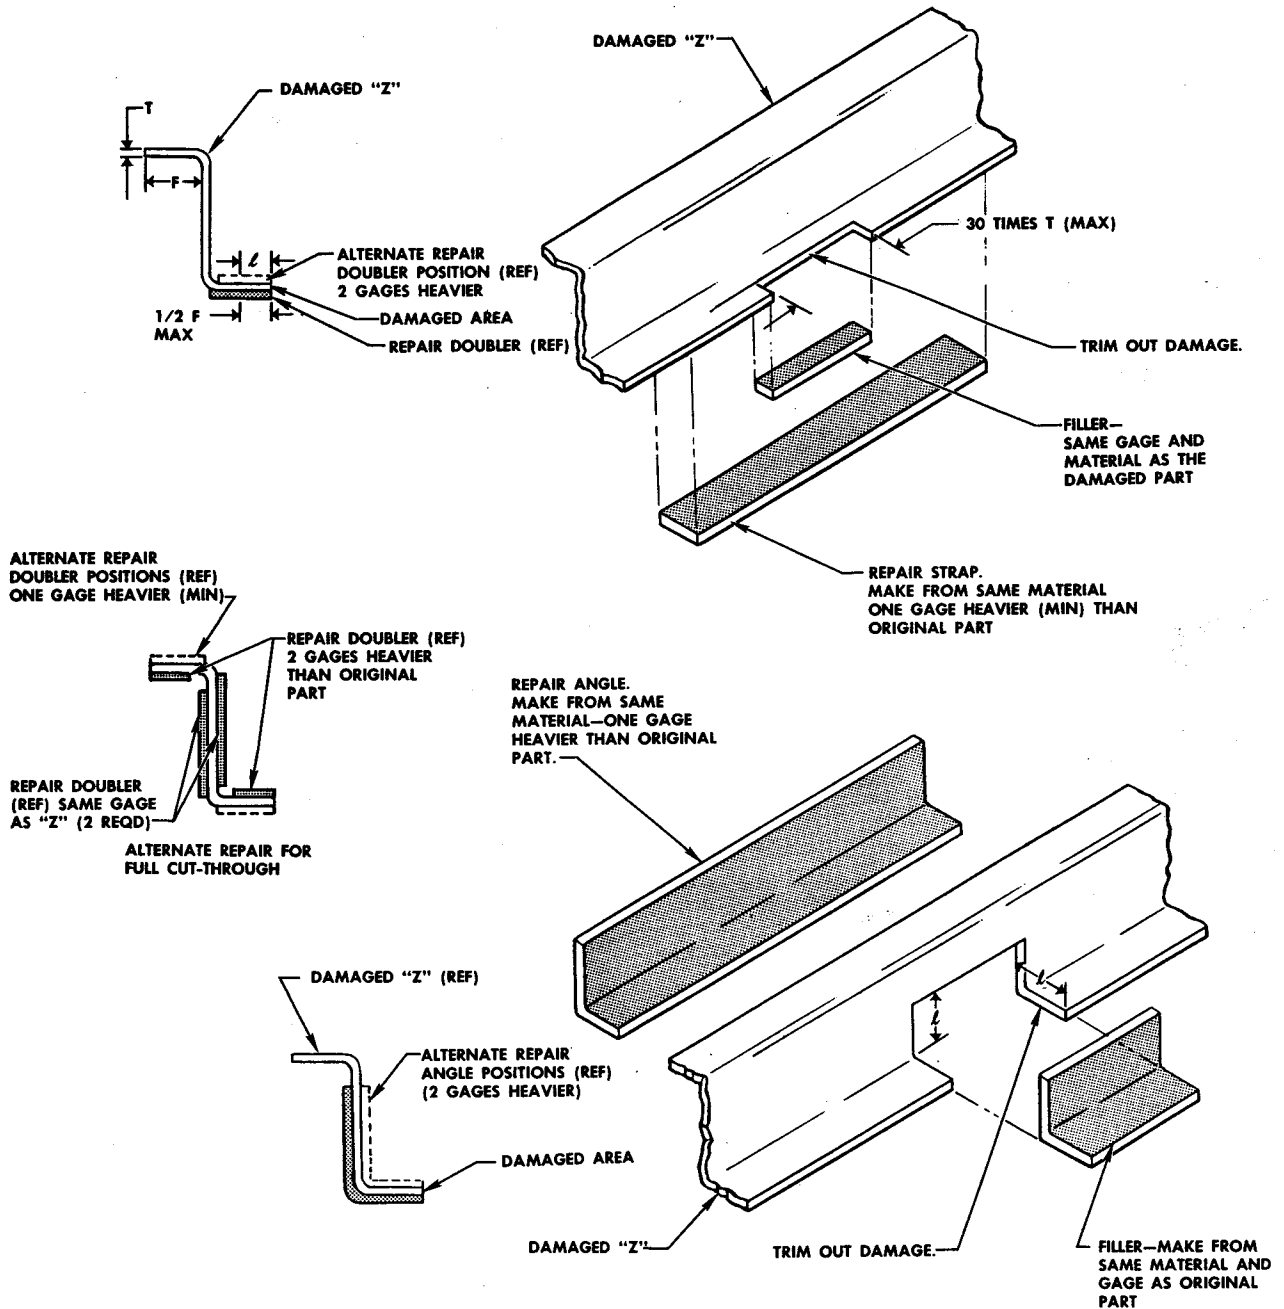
Formed "Z" Section Repairs (Sheet 1 of 2)
